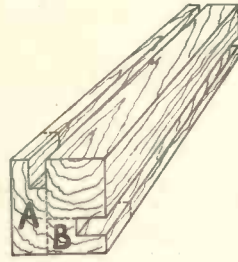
PREPARING THE CORNER MOULDINGS.
